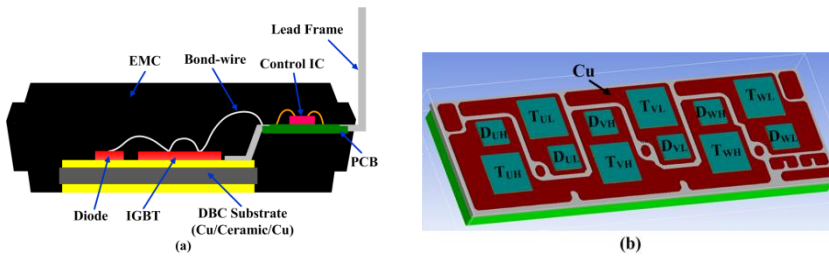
Transfer Molded Intelligent Power IGBT Module
